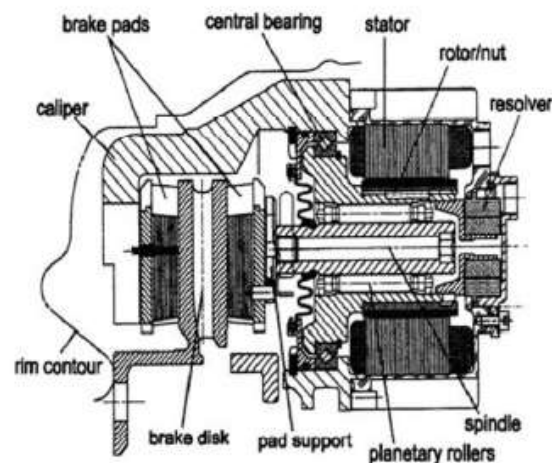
Electromechanical brake caliper using a Switch-Reluctance Motor (SRM) [17]
